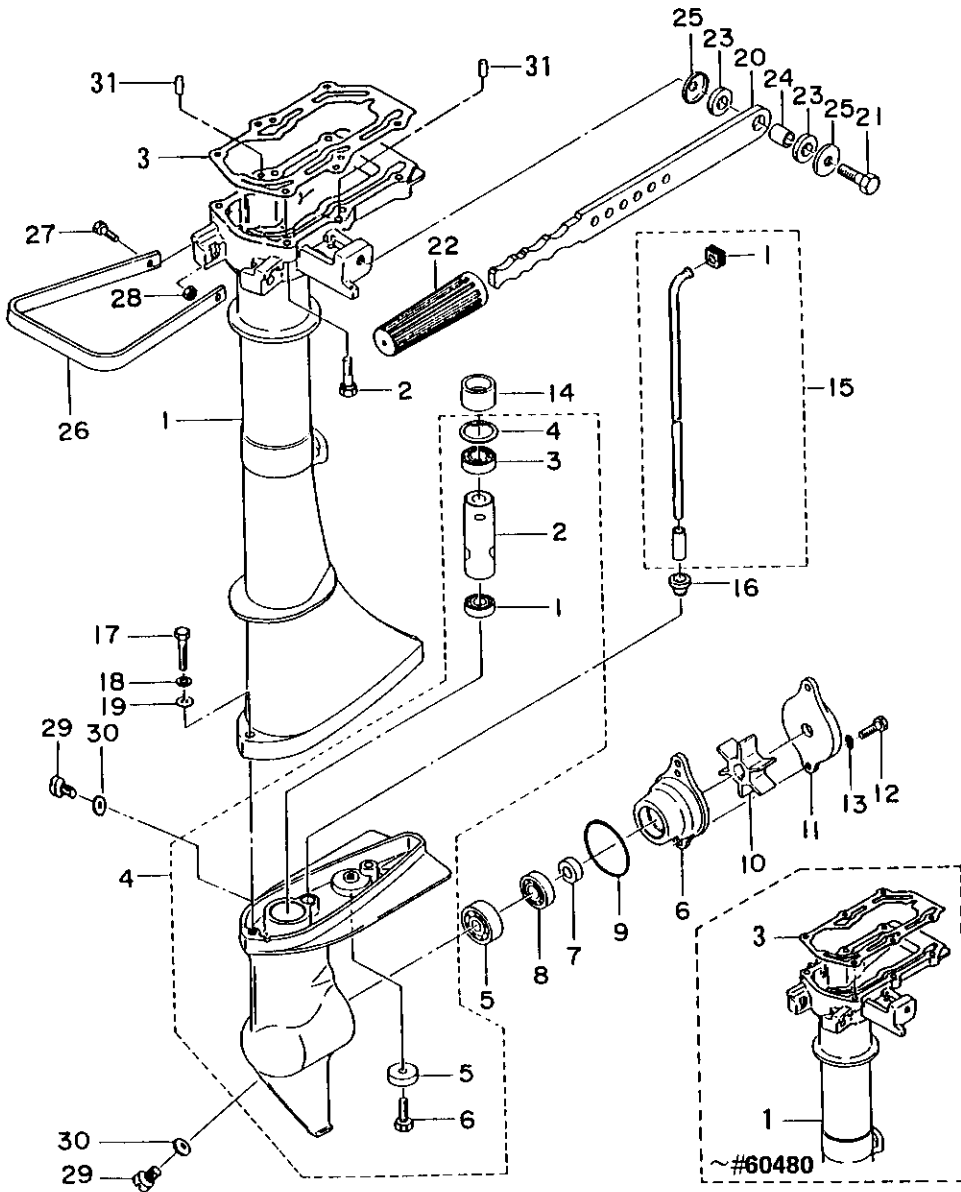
DRIVE SHAFT HOUSING, GEAR CASE & STEERING HAND
